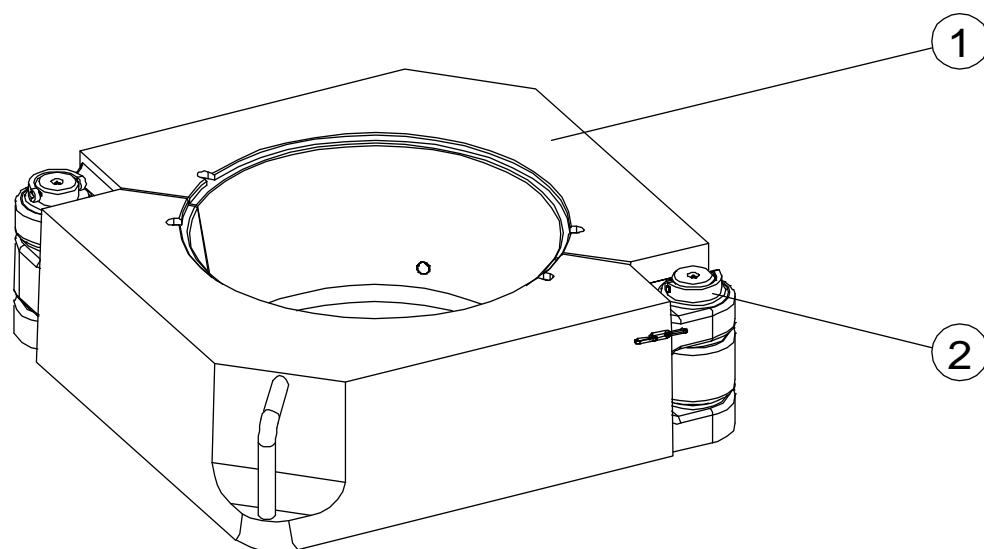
Principle drawing of HCS 200 - 13.3/8"
